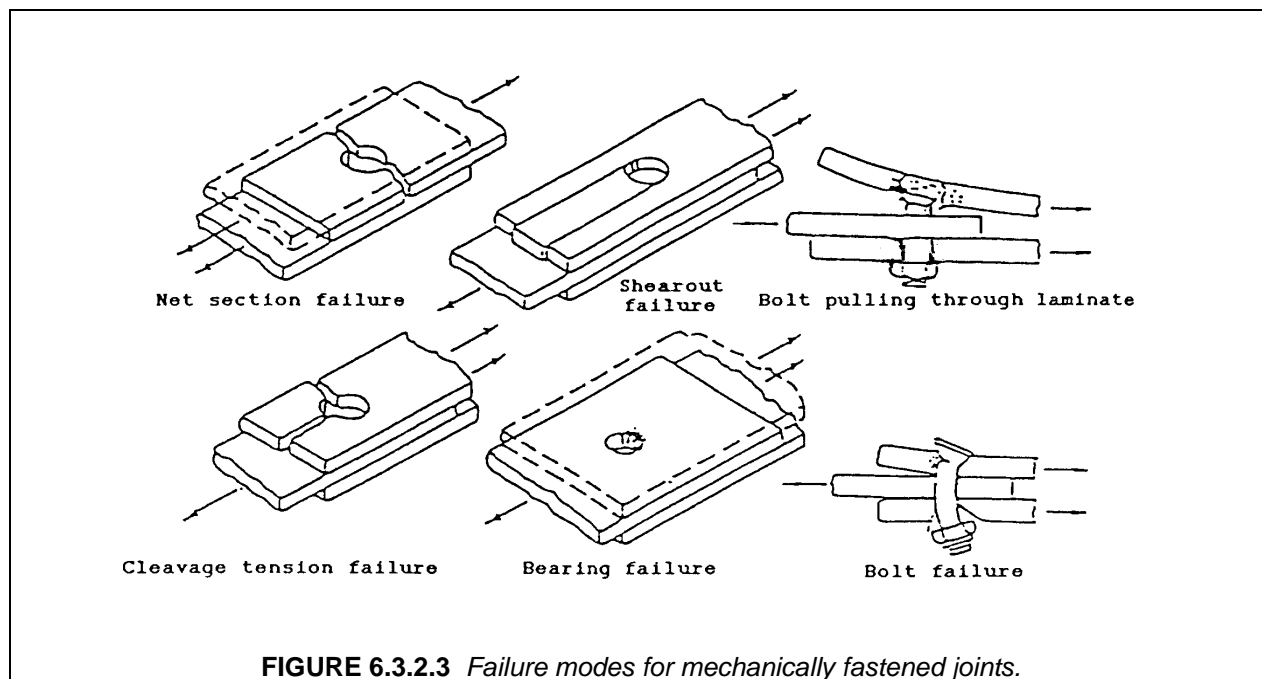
Failure modes for mechanically fastened joints.
